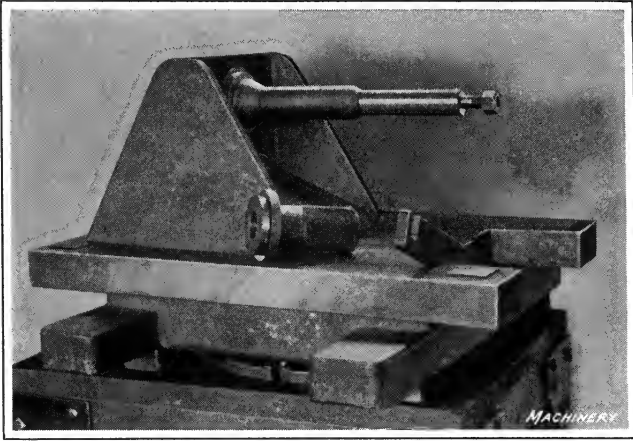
Fixture equipped with Trunnioned Roller Bearings, used in tapping Holes
